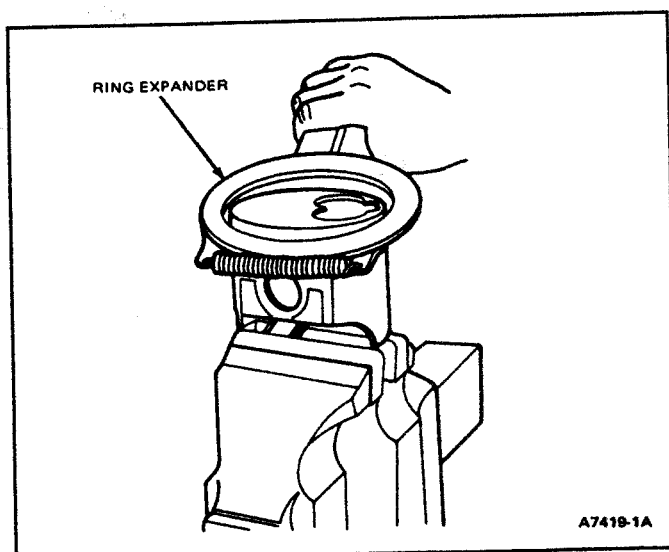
Installing Piston Ring Using Suitable Piston Ring Expander Tool
